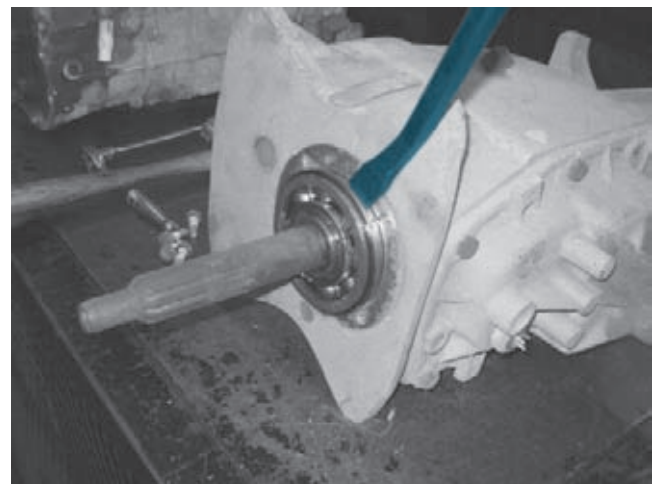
On this transmission, the bearing is pried off the main drive gear so that the gear, along with the mainshaft, can be removed through the rear of the case.
